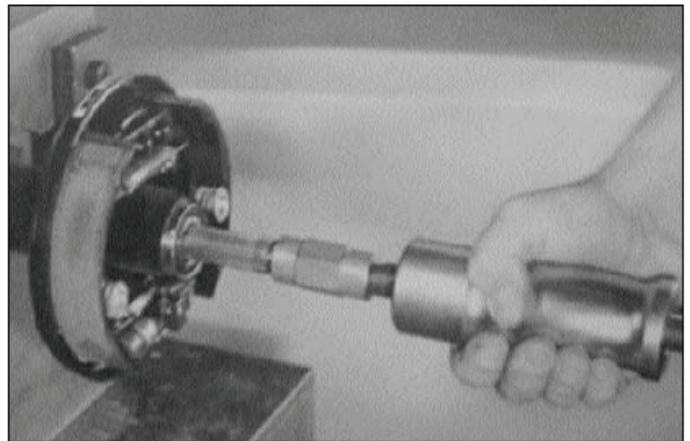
Removing Axle Shaft/Bearing Assembly
